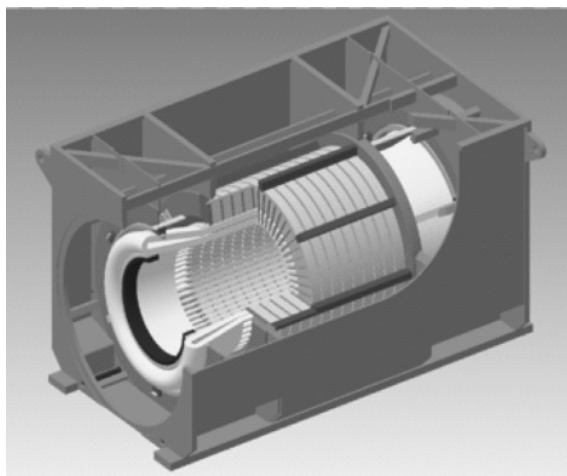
Sectional view of frame and stator assembly. Reproduced with permission of Parsons Peebles, Scotland.
